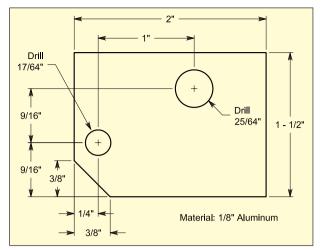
Potentiometer mounting plate. The position of the potentiometer mounting hole is critical for proper gear-meshing. Drill the plate accurately and mark the blank plate before drilling.
